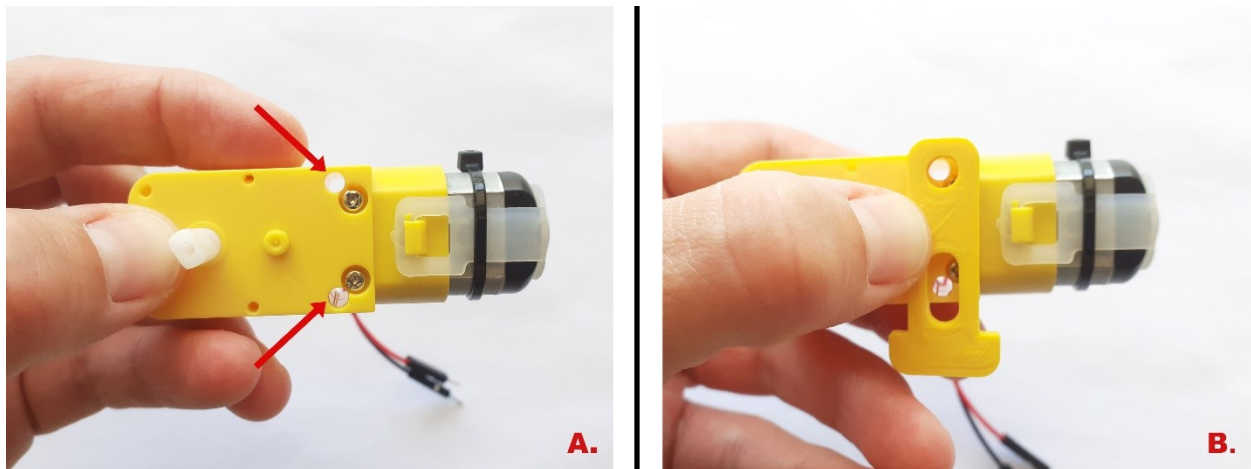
A. The see-through holes on the DC gear motor; B. Demonstration of where the fasteners/brackets should be placed
